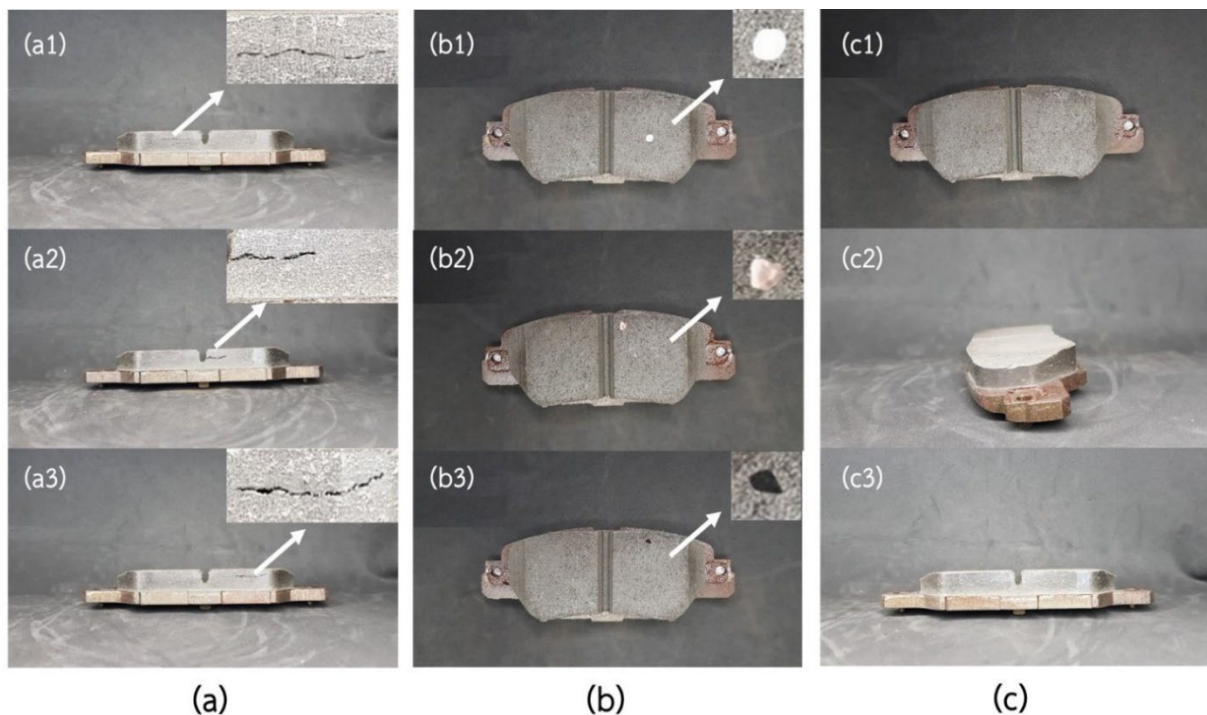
Examples of brake pads in the dataset: (a) splits; (b) poorly consolidate friction material; (c) good brake pad
